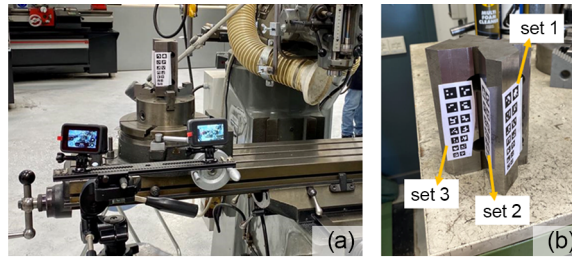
Setup of the experiment: (a) the setup on the milling machine, (b) three sets of markers that are attached to the workpiece.
